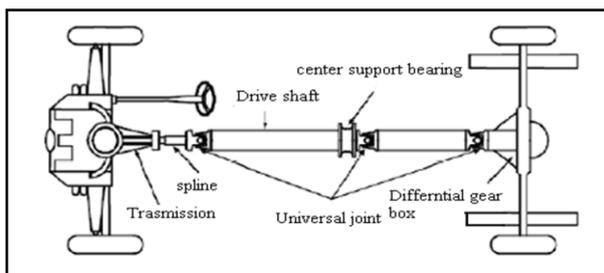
Conventional two-piece steel drive shaft for a rear wheel drive vehicle
